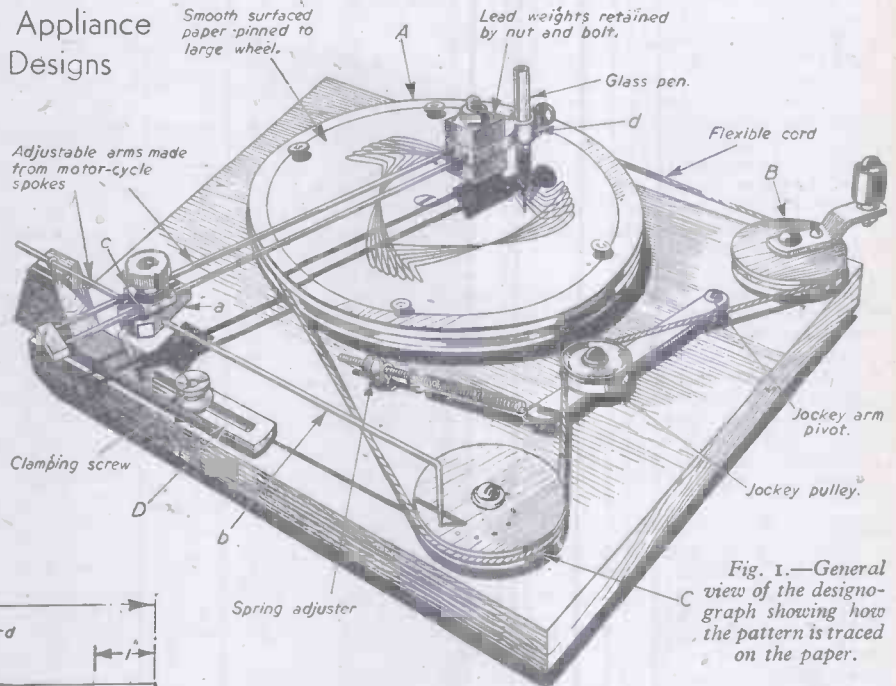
General view of the designograph showing how the pattern is traced on the paper.
